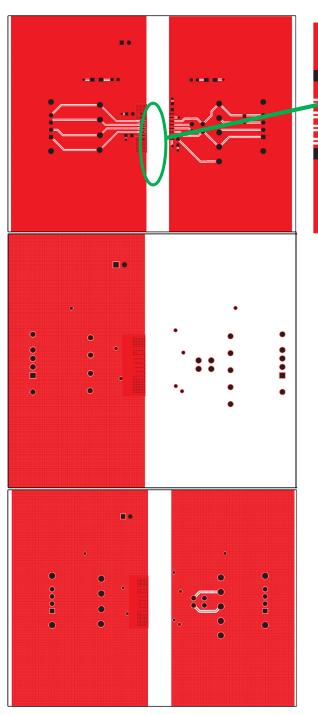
IL4622-01 Evaluation PCB Layout. Top left: top layer. Top right: controller side close-up. Middle: inner layers. Bottom: bottom layer.
